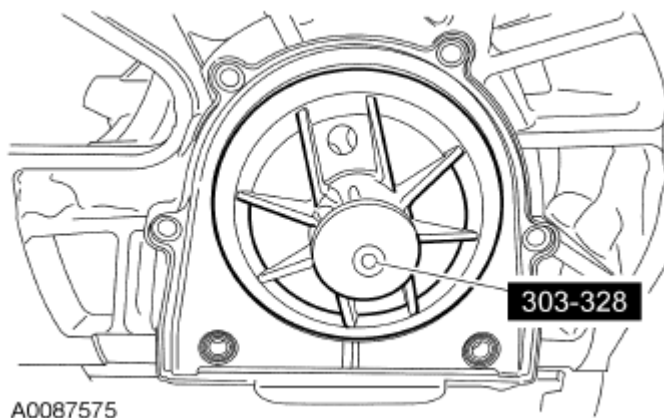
Identifying Crankshaft Rear Main Oil Seal Installer
